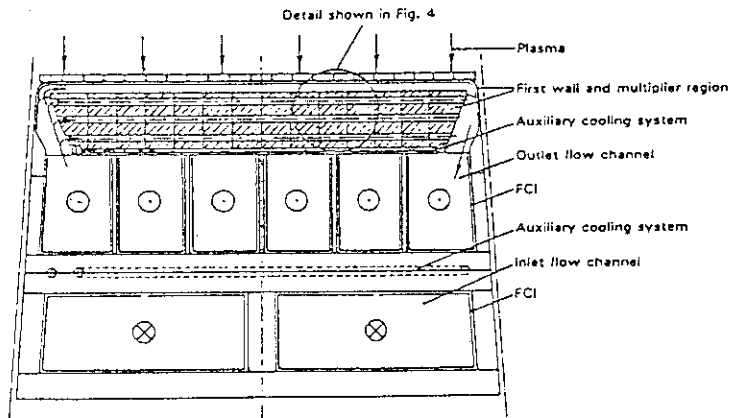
(b) Cross section of a liquid-metal-cooled blanket segment for NET, detail of Fig. 12.²⁸⁾
